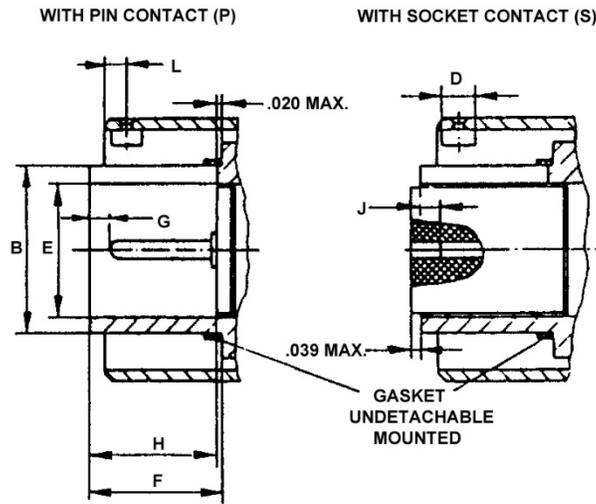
Configuration and dimensions for plug connector with pin and socket contacts
